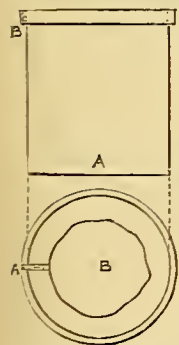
REMOVAL OF REMAINS OF LID. A, Elevation. B, Plan.
